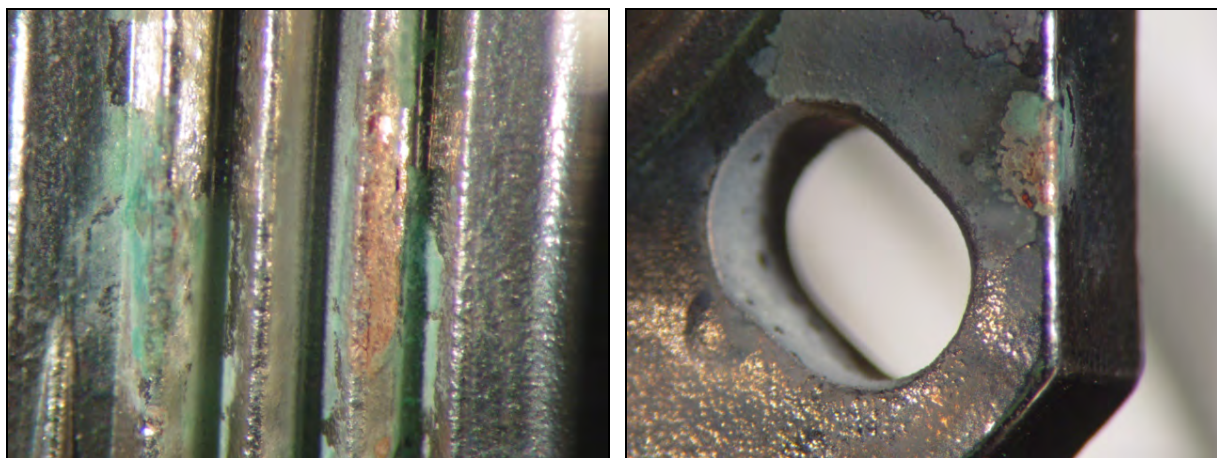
3-7, B3a3-6. M38999 class W sample with SCB applied exhibited flaking plating and pitting of the vase aluminum on the rear accessory threads after salt spray.
